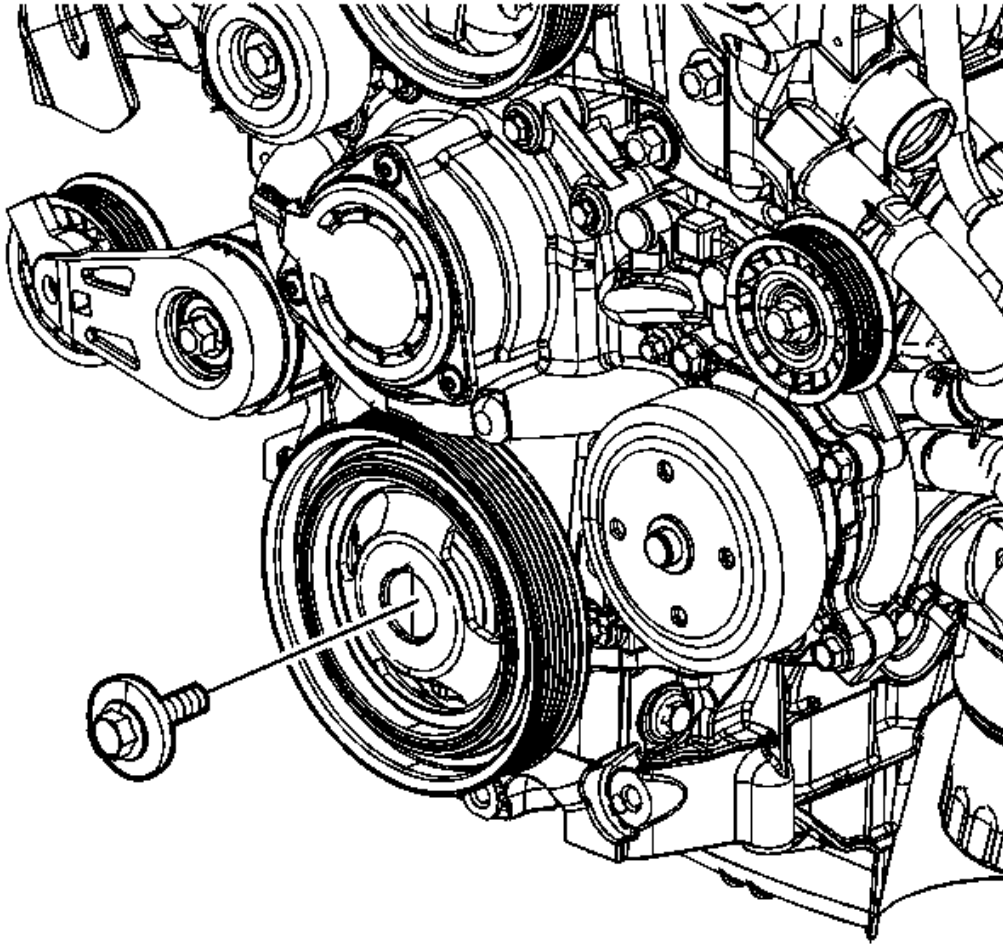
Identifying Crankshaft Balancer Bolt & Washer
